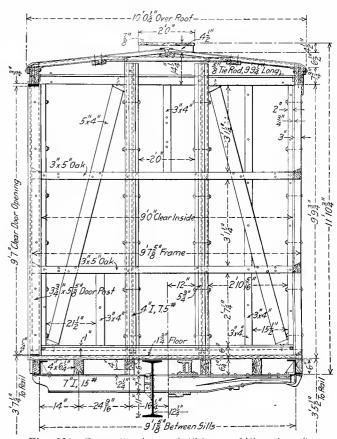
Cross Sections of Chicago, Milwaukee & St. Paul Automobile Car Shown in Figs. 282 and 283.
